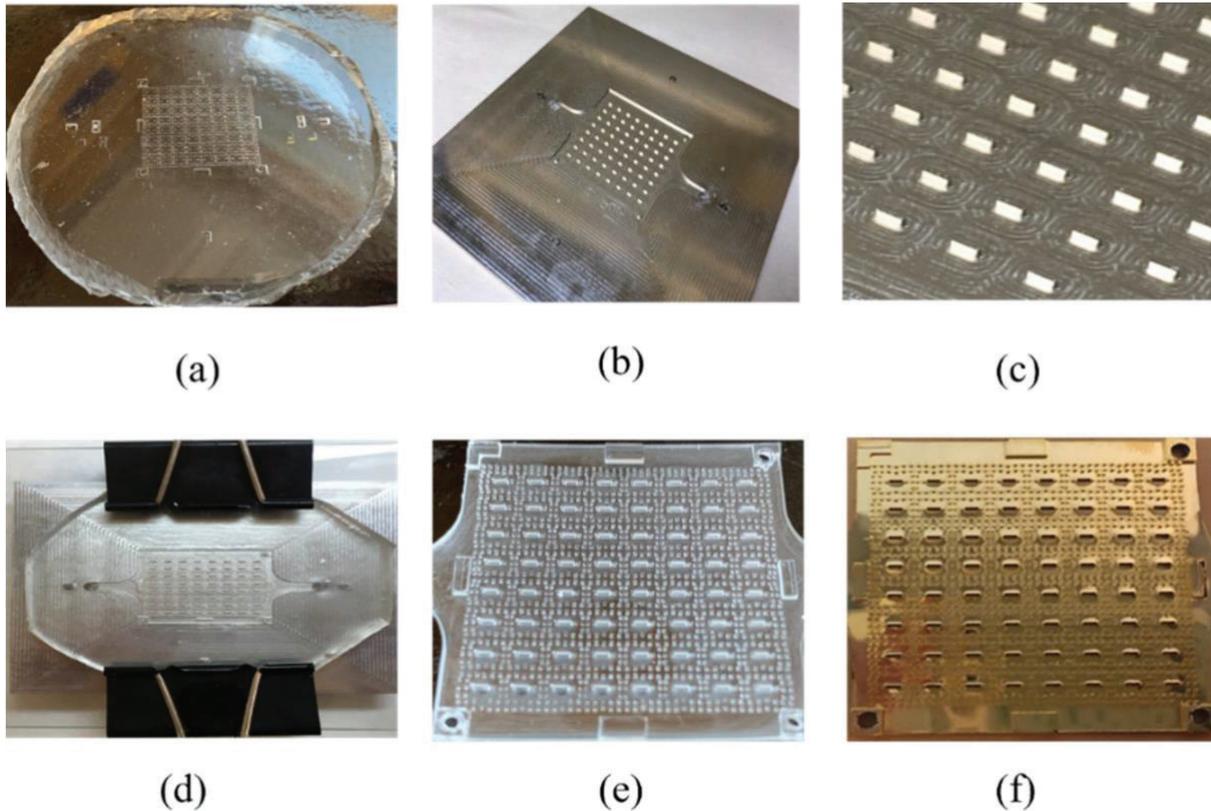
Injection molding steps for the cavity layer. (a) PDMS mold for the cavity layer, (b) aluminum (Al) mold, (c) closed image of the milled Al piece showing the pins to create the cavity opening after injection molding, (d) PDMS mold on top of the aluminum mold, ready for injection molding, (e) cavity layer made of OSTEMER after UV exposure and heat cure, (d) cavity layer after conductive layer deposition.
